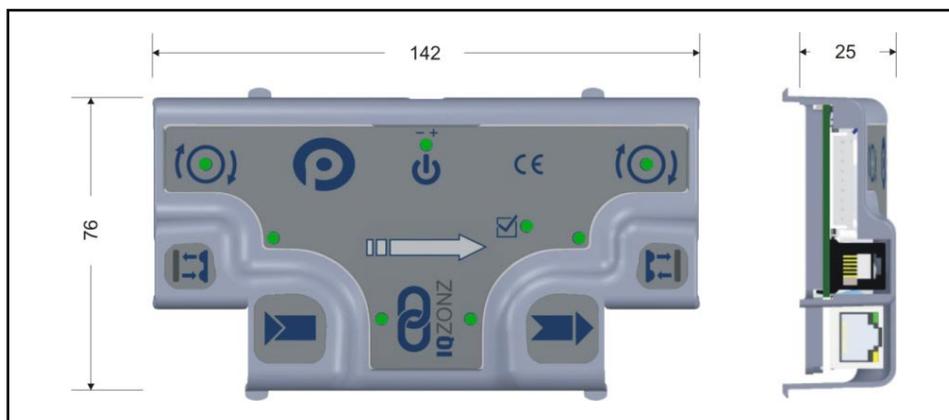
IQZONZ MOUNTING HOLE DIMENSIONS
